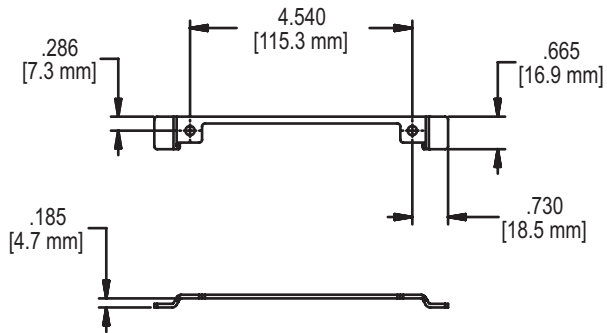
TRACK & SLIDER ASSEMBLY 11576.XX
